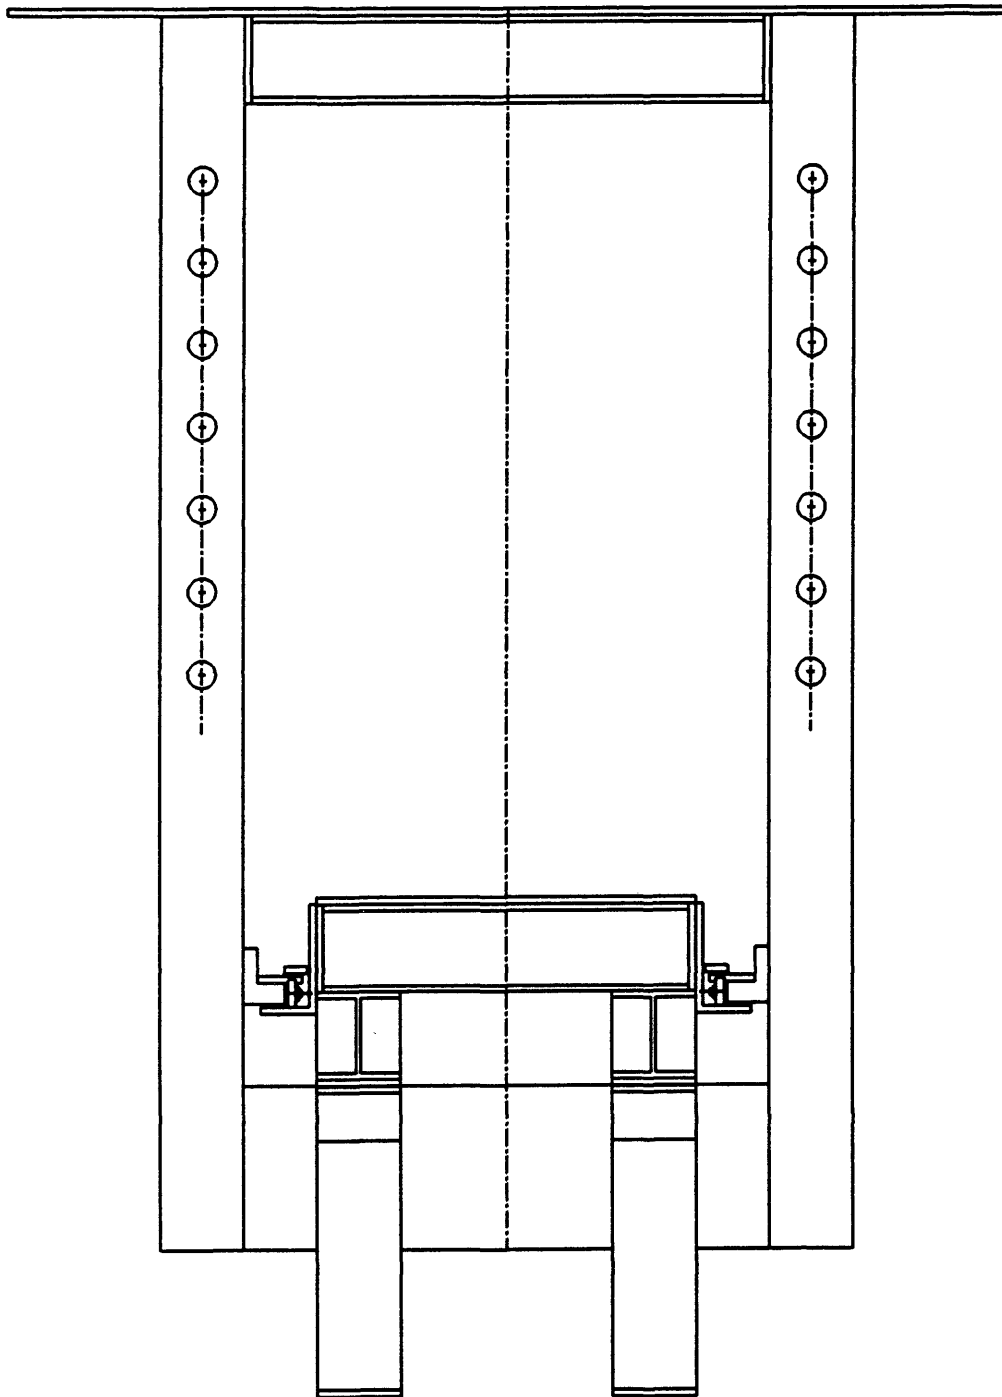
Front View of the Hydraulic Press without the Hydraulic Cylinder Support Structure
